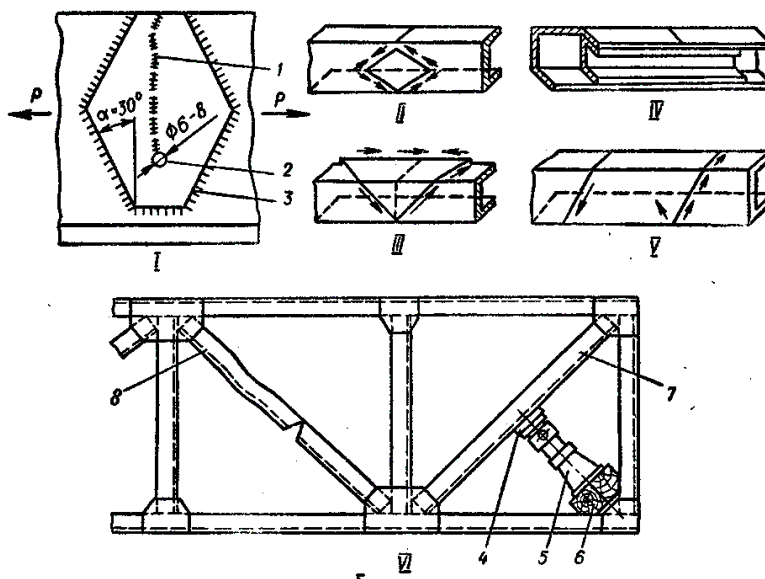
Repair schemes of metal construction of lifting-and-shifting machines: 1 – repair of an element with a crack; II, III, IV – placing a suitable diamond-shaped, triangular and gutter covers; V – replacement of defective sections; VI – flattening and replacement of defective crane segments: 1 – crack; 2 – hole-deconcentrator; 3 – cover; 4 – sub plate; 5 – jack; 6 – bars; 7 – element subjected to flattening; 8 – element subjected to replacing.
